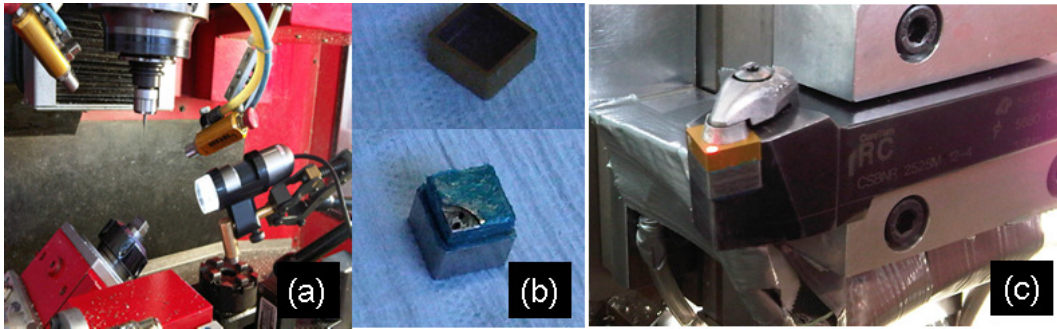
(a) Production of the micro channels in the cooling adaptor on a five-axis micro-milling machine; (b) top: bottle-cap insert, bottom: cooling adaptor; (c) fully integrated cutting tool.
